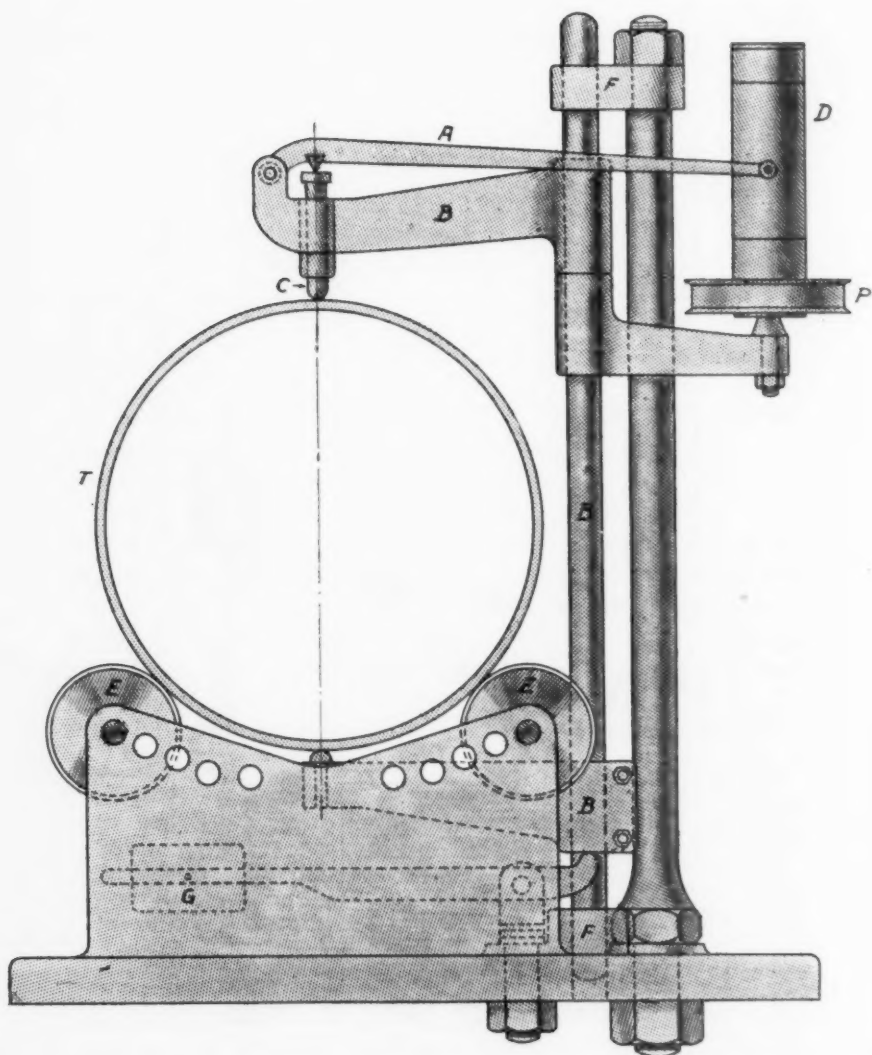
AUTOGRAPHIC CALIPERING APPARATUS NO. 2. ESPECIALLY DESIGNED AND CONSTRUCTED FOR OBTAINING THE OUT-OF-ROUNDNESS OF TUBES USED IN MAKING COLLAPSING TESTS CONDUCTED BY PROF. R. T. STEWART.
